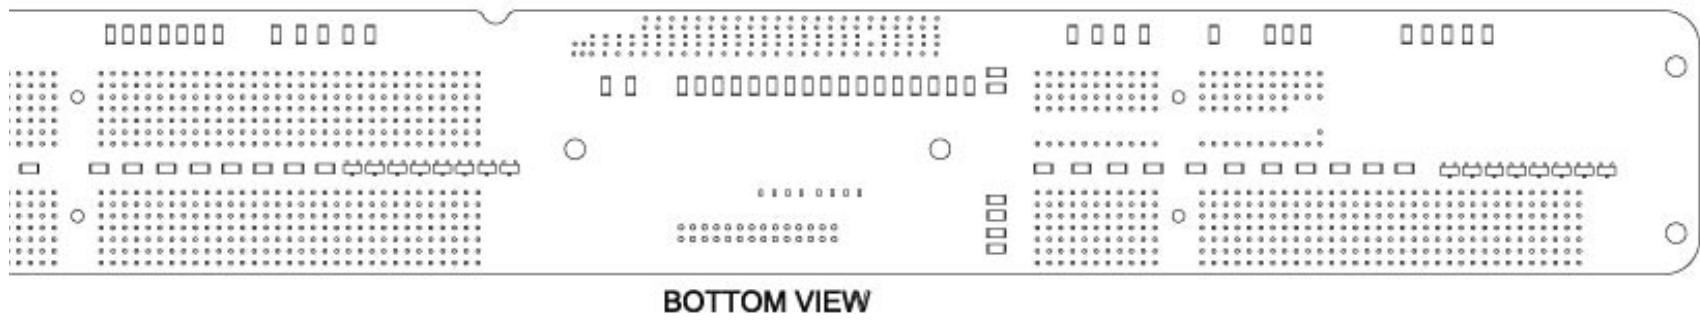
ALT-8000 RAD/ALT Base Card Cage Mech Assembly (A1A2A2A1)
